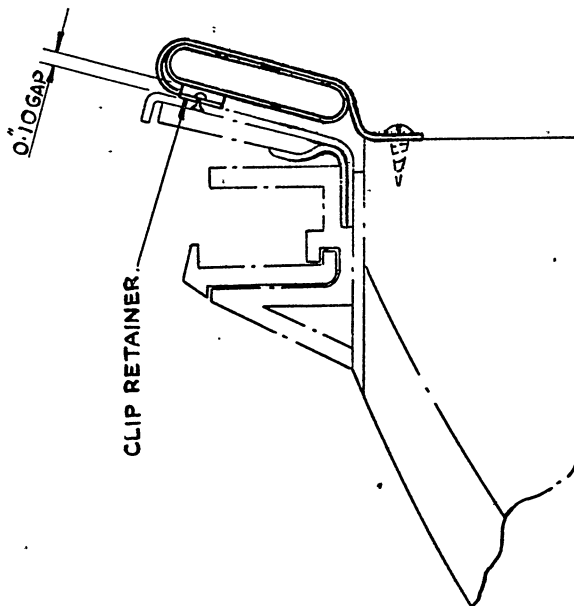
VIEW ON ARROWS C-C' (FROM SHEET 1 OF DRAWING)
